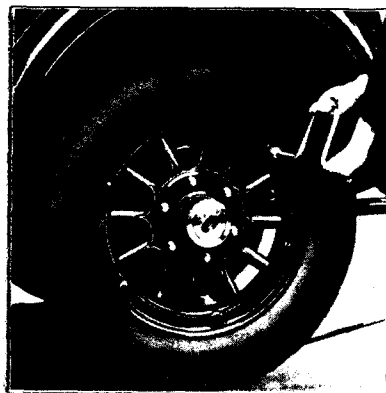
Jack up the wheel until the tire clears the ground. Remove the dust cap and clamping nut from the valve stem. Remove the six rim clamps, unscrewing them with the brace wrench supplied in the tool kit.
